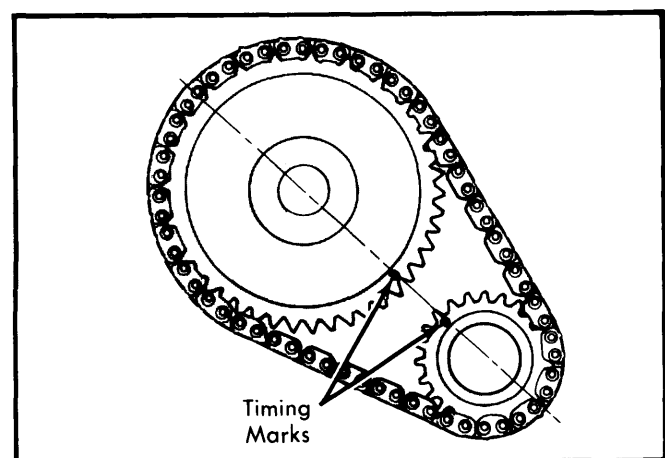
Timing Chain and Crankshaft Sprocket Alignment
